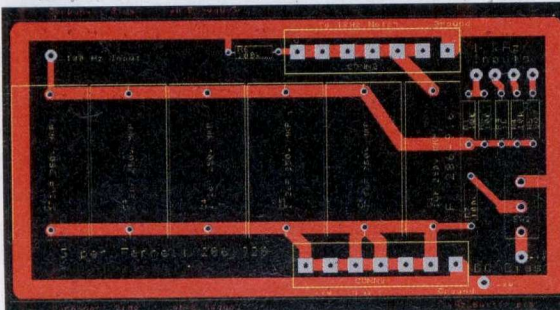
The 110 x 55 mm single sided PCB used to assemble Figure 3, the 1kHz DC blocking buffer network.
